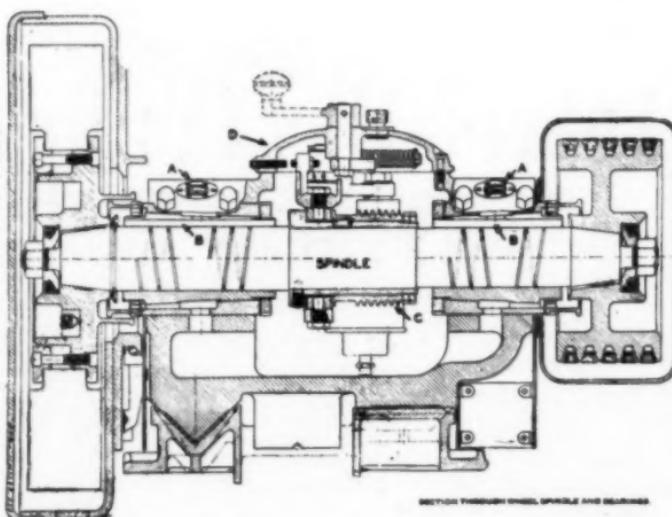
Norton grinder wheel spindle unit assembly. The spindle runs in bronze bearings "B" which are tapered on their outer diameter and drawn into cast iron cases. Lubrication is maintained by a small pump driven by worm "C" on spindle. This pumps spindle lubricant from reservoir in wheel-slide through an external filter and thence to each bearing. Lubricant flow is observed through sight window "A" above each bearing. It can be regulated by an adjacent cock. The same lubricating system serves the end thrust, the worm drive and reciprocating parts by direct application through flexible tubing (to the end thrust parts) or by spray deflected from housing cover "D."
